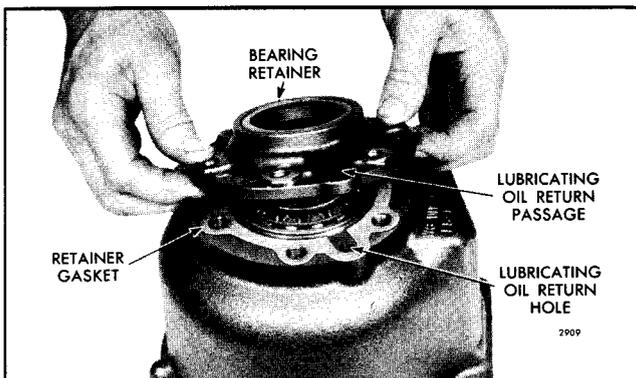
Installing Drive Shaft Bearing Retainer on Gear Housing
